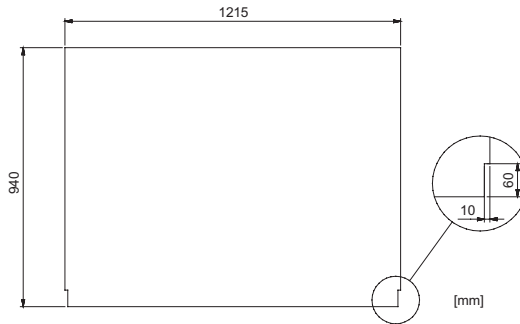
Dimension of the gravel side board. Note that the board has got notches in both bottom corners.
